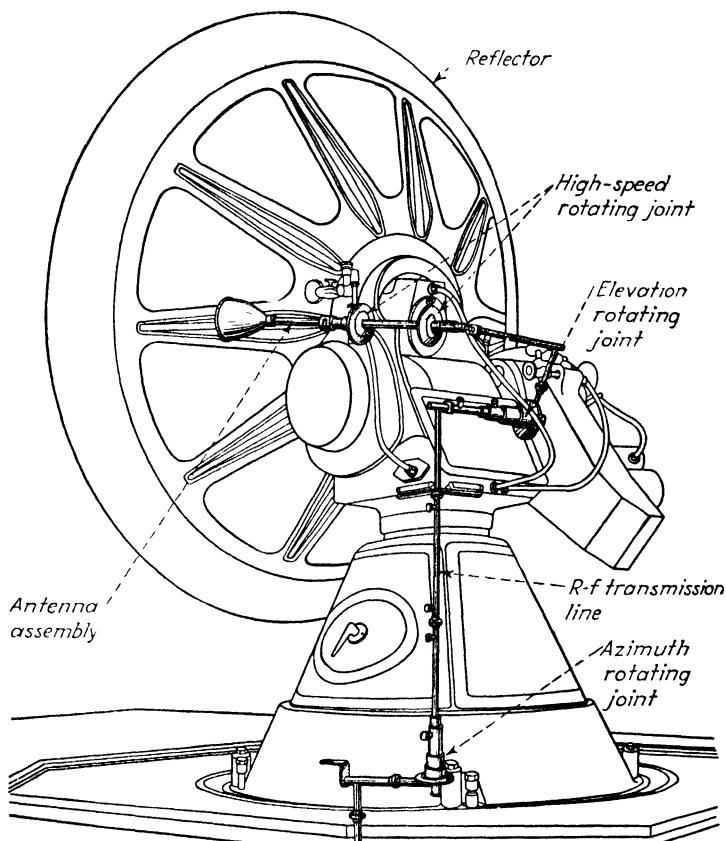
R-f transmission-line system, and rotating joints and radiator of SCR-584 radar.
